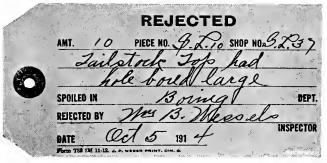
Form used by Inspection Department in rejecting Defective or Spoiled Work
